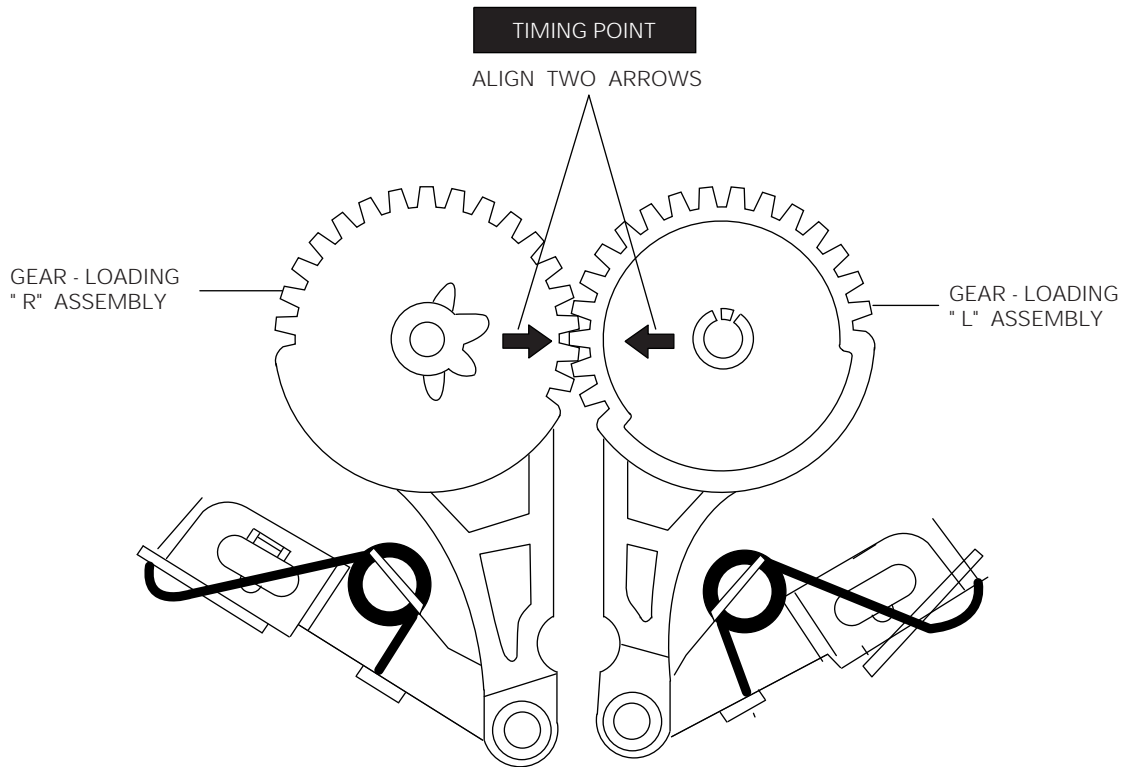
Assembly of Gear Loading "L", "R" Ass'y
